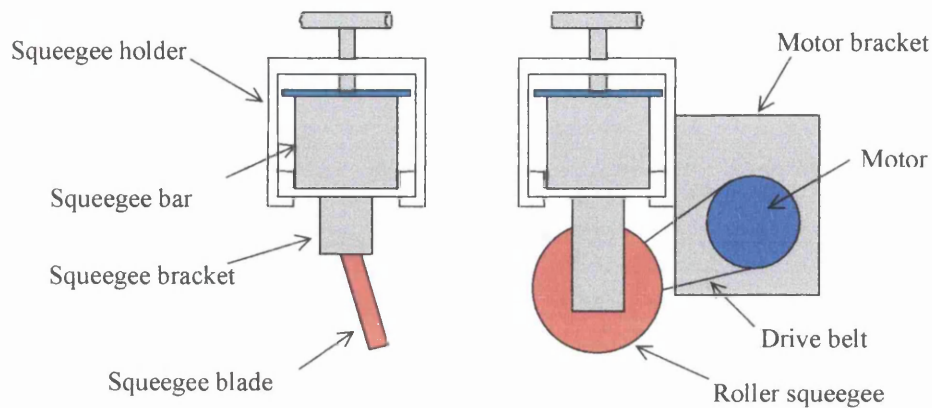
Schematic of Blade Squeegee and Roller Squeegee Fixture
